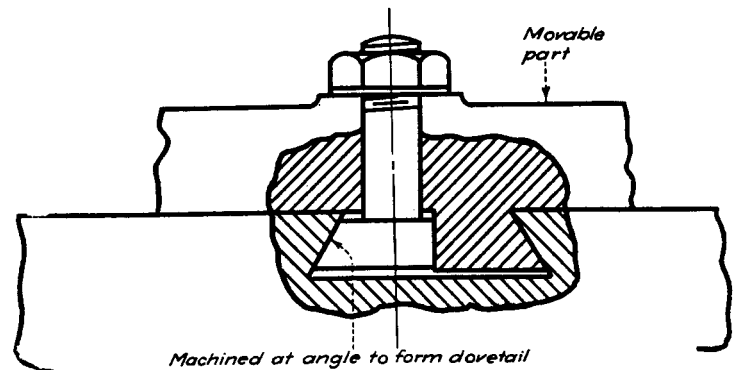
One side of the bolt is machined at an angle to form a side of the dovetail, which tightens in the groove as the nut is drawn tight. The part must be slid the entire length of the slot for removal.
